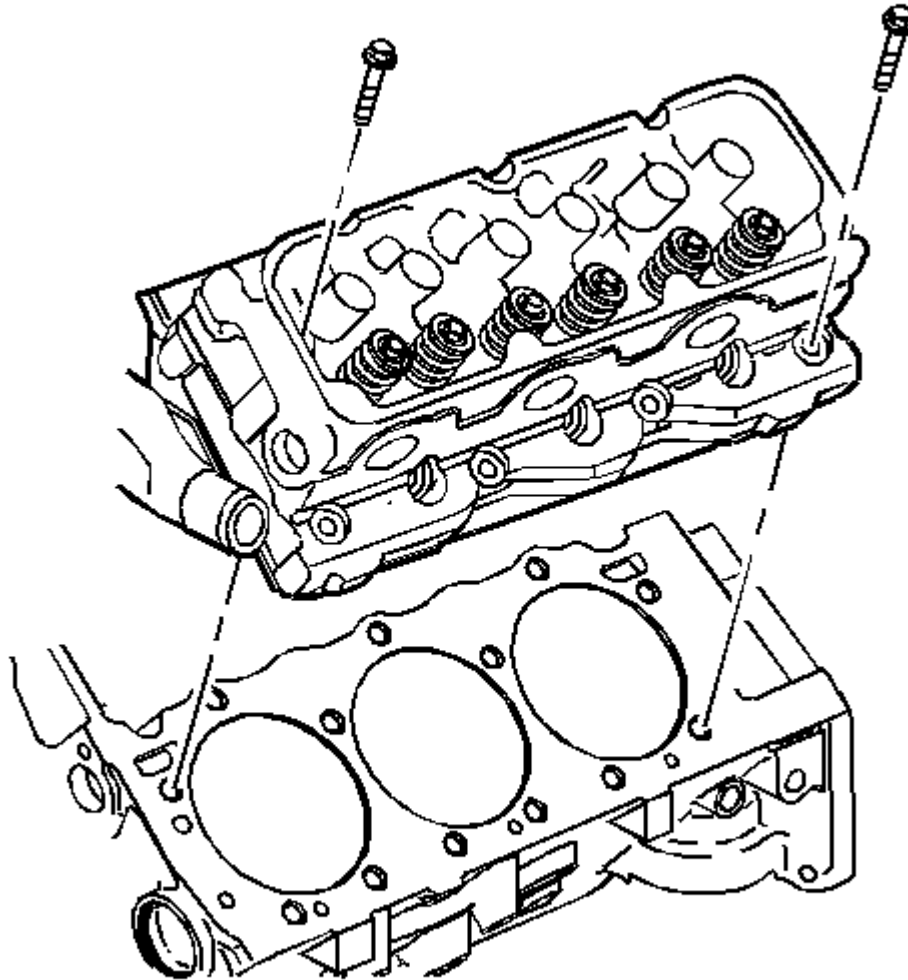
Identifying Cylinder Head & Cylinder Head Bolts
